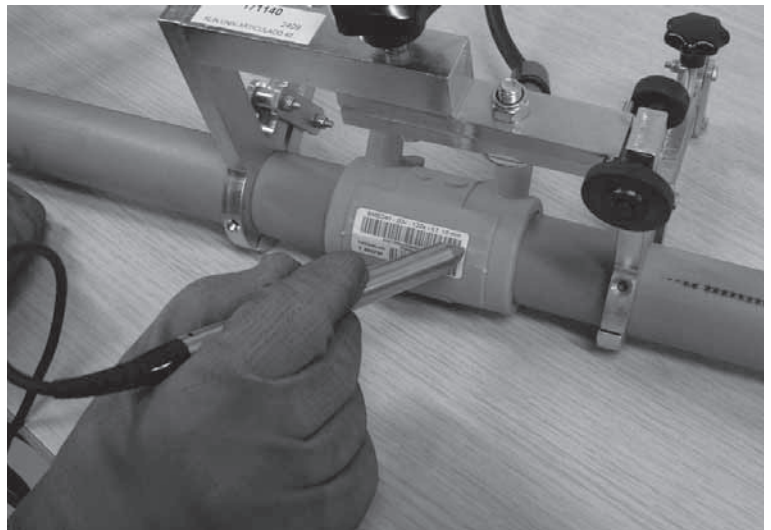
The welding data can be seen on the barcode label of the socket. The data can be read by a barcode reader which should be part of a suitable electrofusion machine
